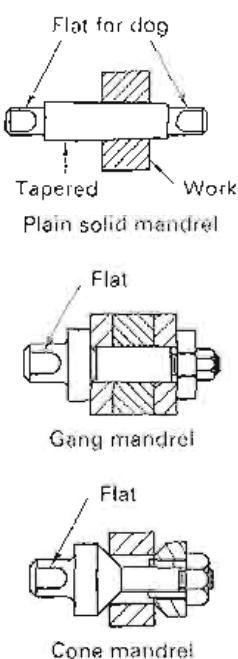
Three types of mandrels, which are mounted between centers for lathe work.
